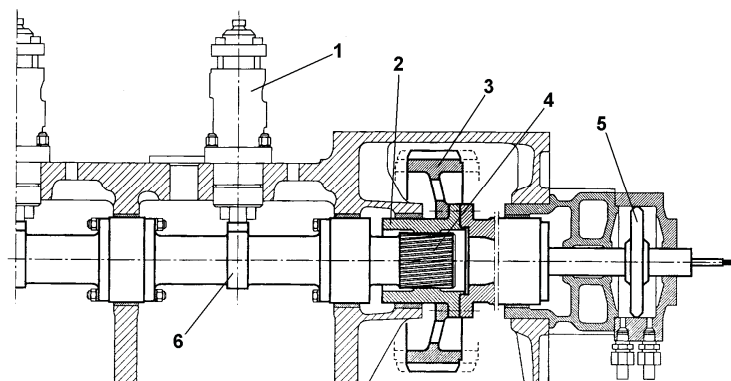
MAN Diesel fuel injection timing control system [5]: 1 - fuel pump, 2 - moving cylinder with internal slanting connection with camshaft end, 3 - gear, 4 - end of camshaft, 5 - hydraulic servomotor
